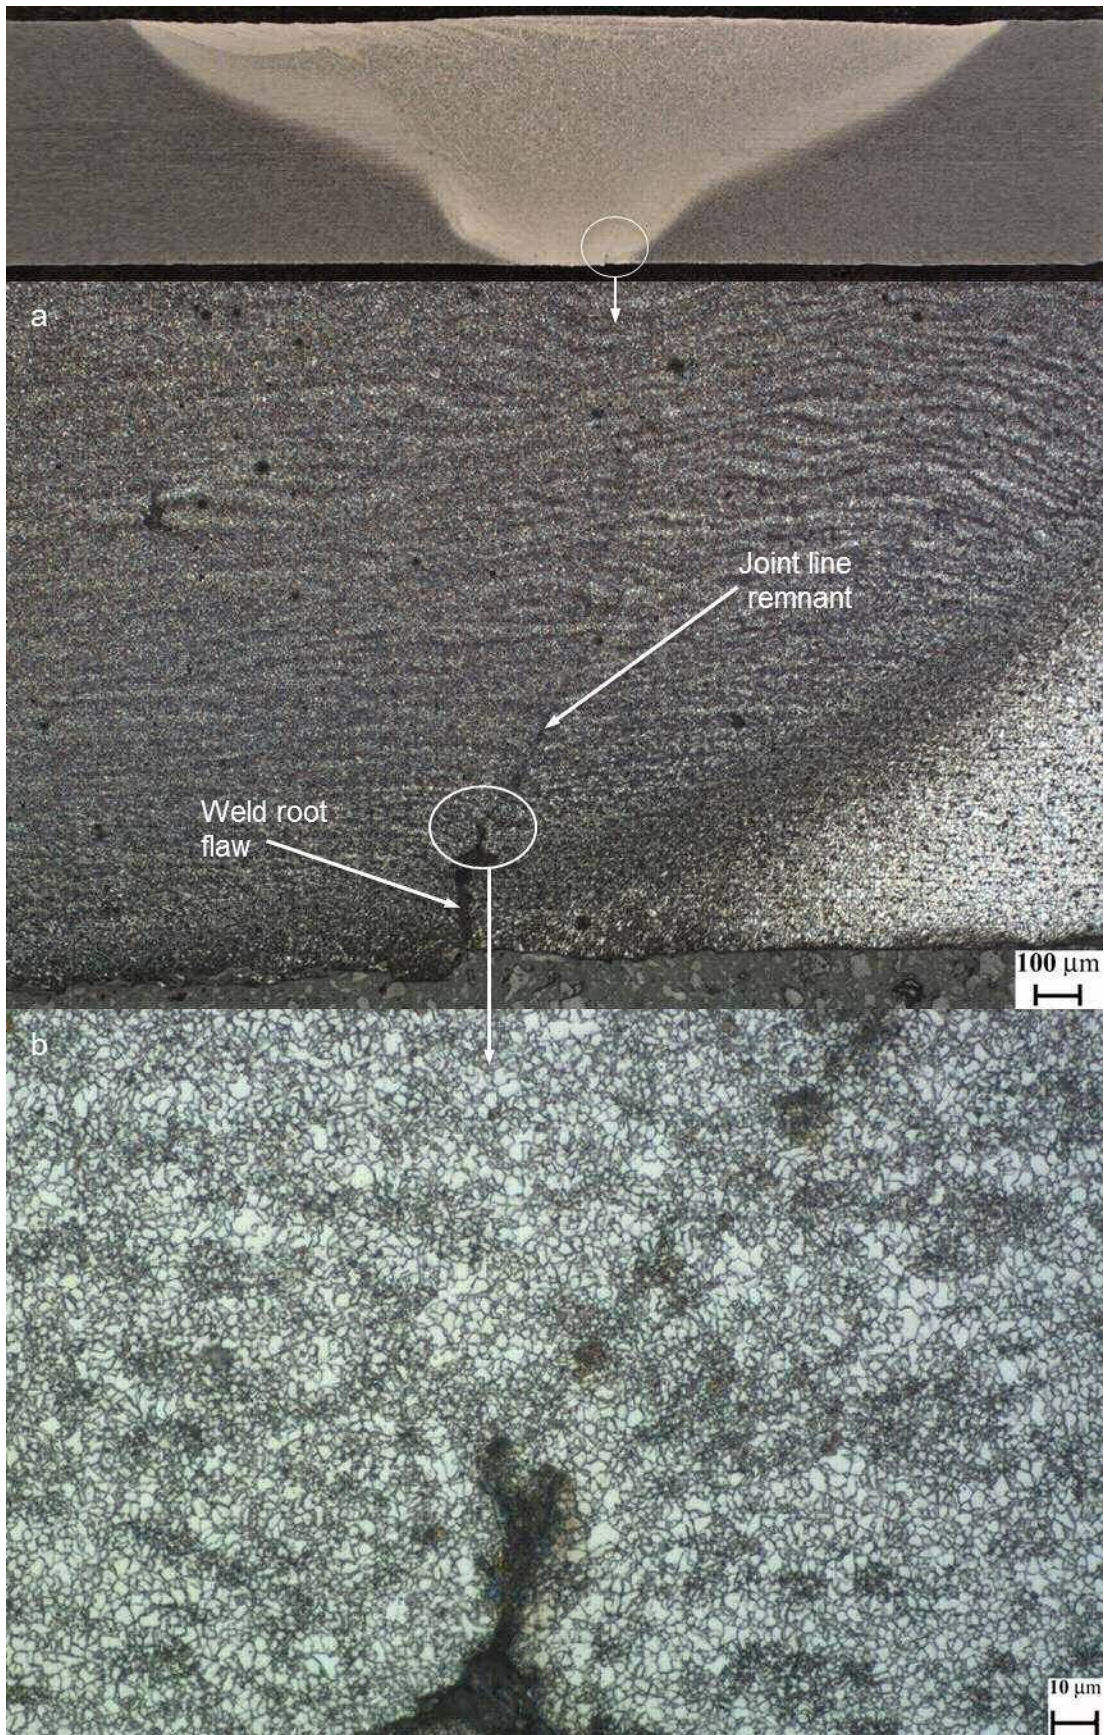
Fast weld, root (a) [x50, Etched]; (b) [x500, Etched]
